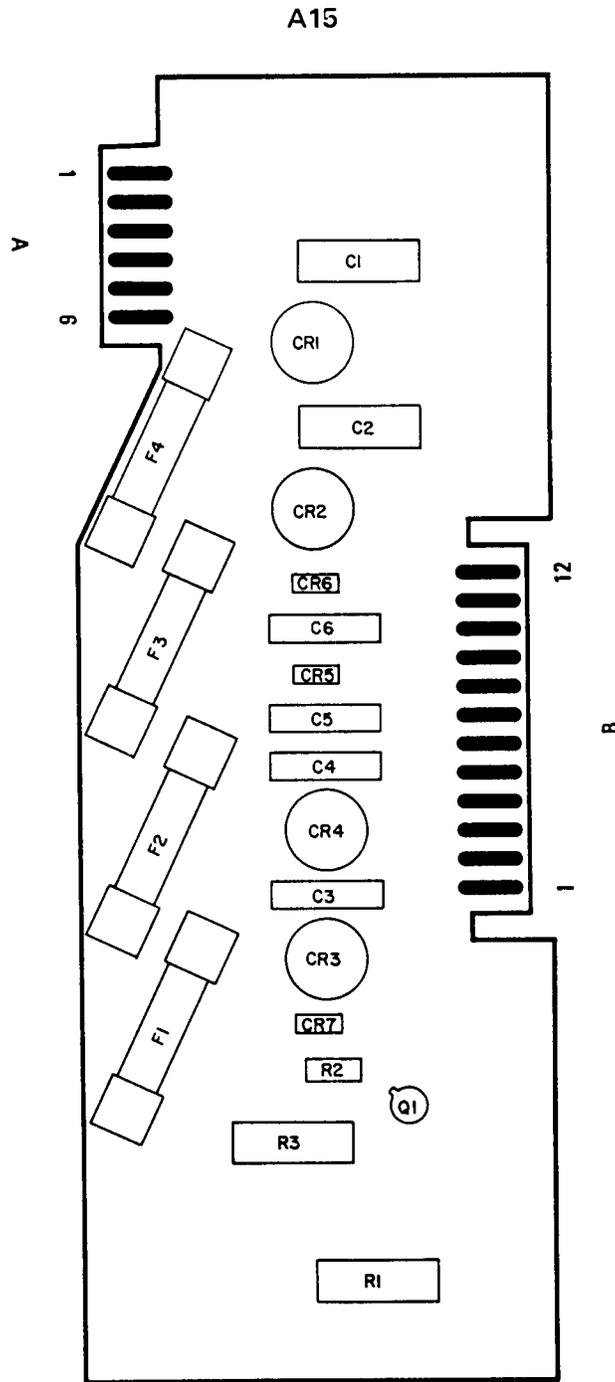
A15, Rectifier Assembly, Components (CHANGE 12)
